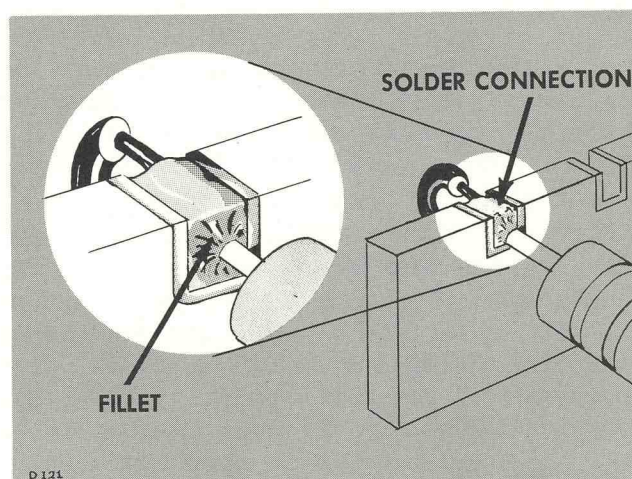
A slight fillet of solder is formed around the wire when heat is applied correctly.
